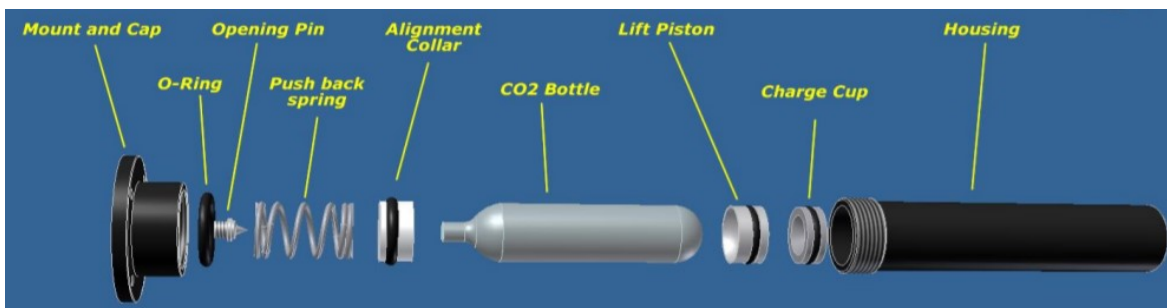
Tinder Rocketry Peregrine exploded view [38]. Copyright © 2016 Tinder Rocketry.
